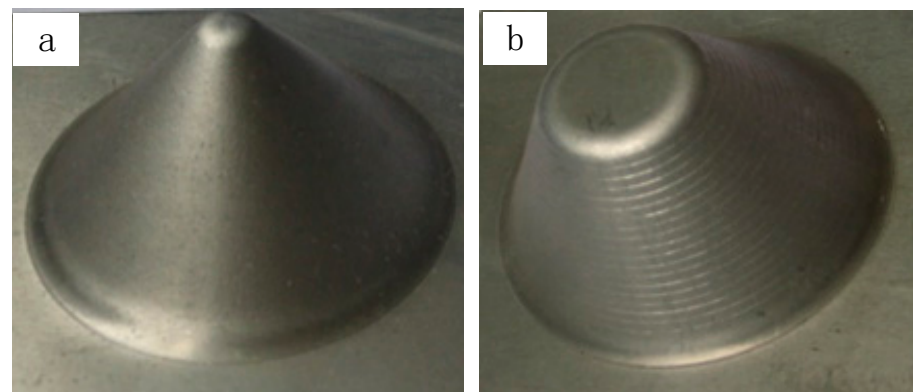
Experimental molded parts: (a) the specimen with forming angles of 45° and (b) the specimen with forming angles of 58°.
